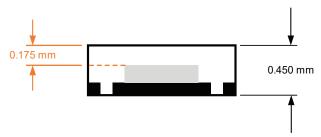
XtremeSense TMR Sensor Location in z Dimension for CT310 in TSSOP-8 Package
